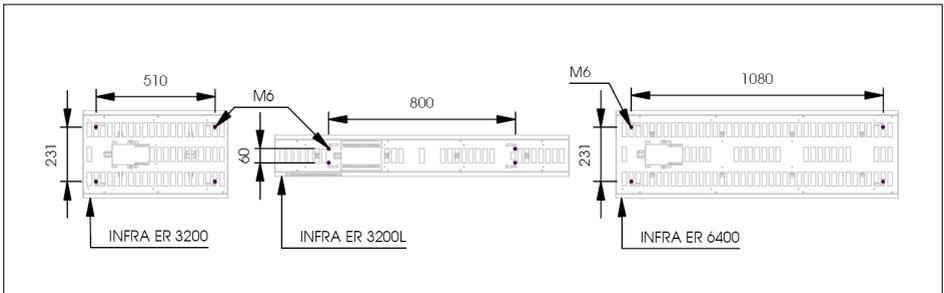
Top views of all types in model with dimensions of mounting points.
